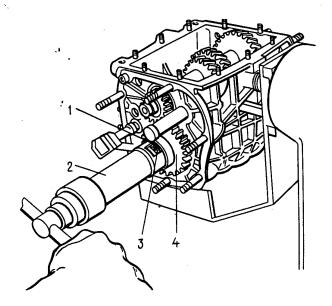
Installing Reverse Gear Lockring on Main Shaft:
